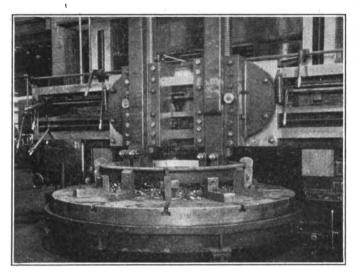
Powerful Holding Fixtures Are Required with Modern Machine Tools
